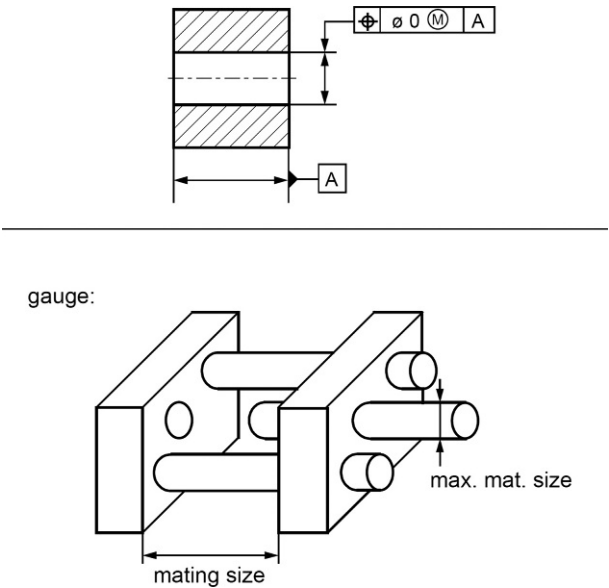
Tolerancing of the perpendicularity
